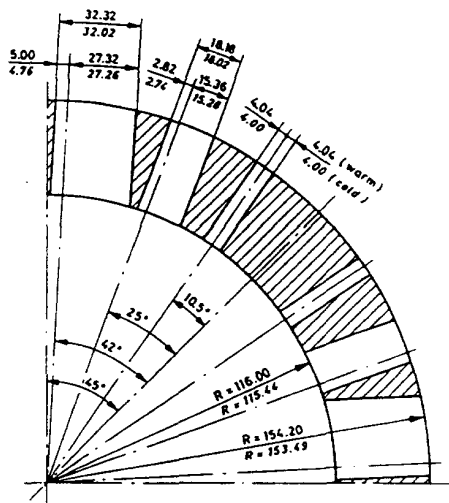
ISR quadrupoles: cross-section of coil with warm and cold dimensions [13]
